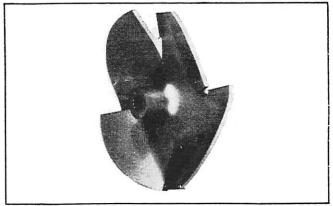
Carburetor Adjusting Propeller D. Test Wheels (Refer to Chart in Section IX.)
